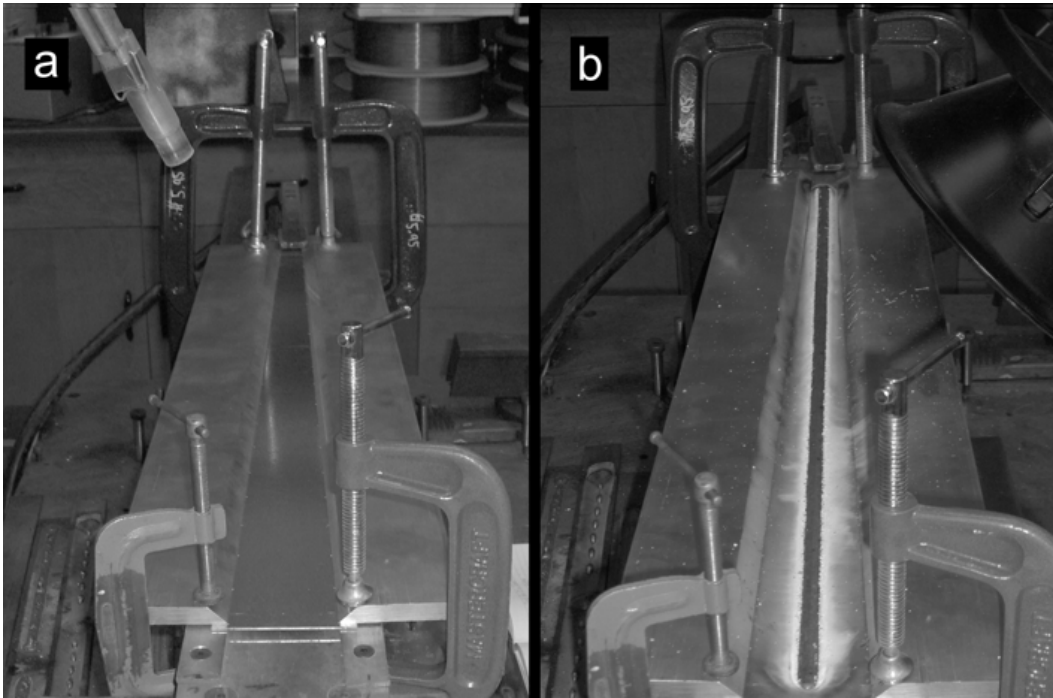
The clamping assembly setup for the clamp spacing trials. Image a) shows the unwelded coupon with the tapered clamping arrangement and image b) shows the welded coupon. Note: The weld start location was at the widest point of clamp spacing.
